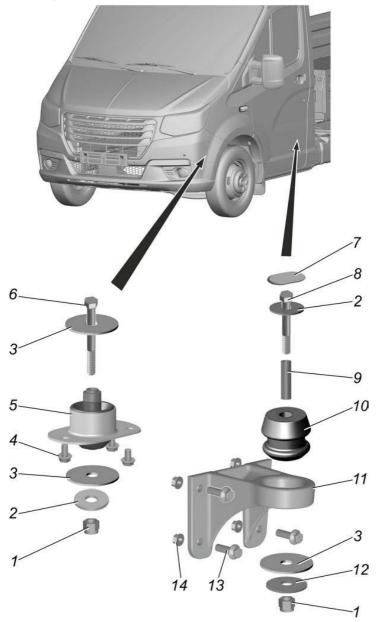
Cab fastening to front suspension subframe and frame: 1, 14 – nuts; 2, 3, 12 – washers; 4, 6, 8, 13 – bolts; 5 – front support; 7 – plug; 9 – distance bushing; 10 – pad; 11 – rear cab mounting bracket
